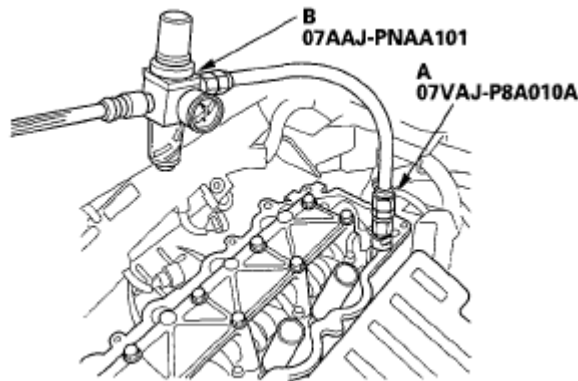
Locating VTEC Air Adapter & Air Pressure Regulator
